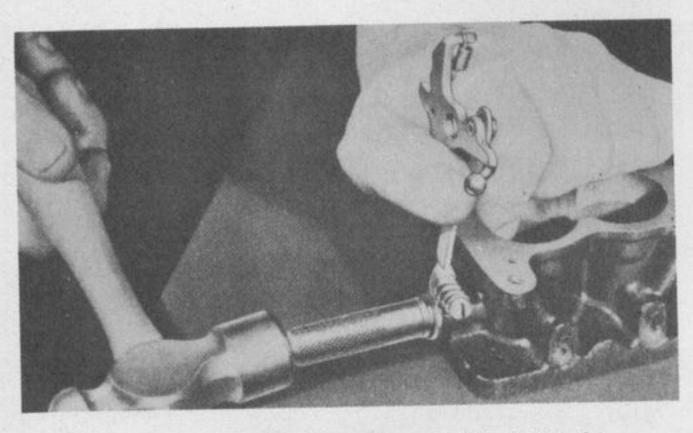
Installing Throttle Shaft Bushing (Lever Side)
